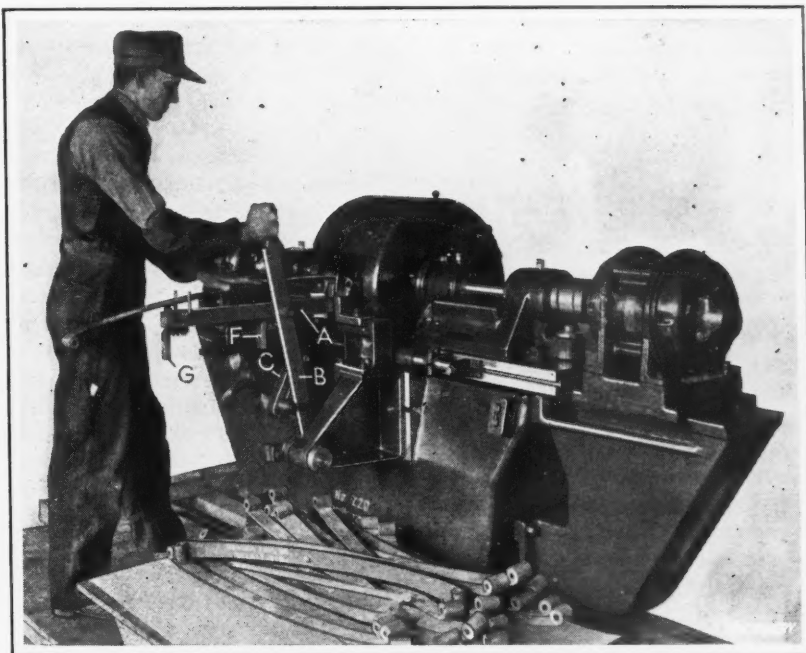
Double-disk Grinding Machine adapted for finishing the Eye Ends of Leaf Springs
